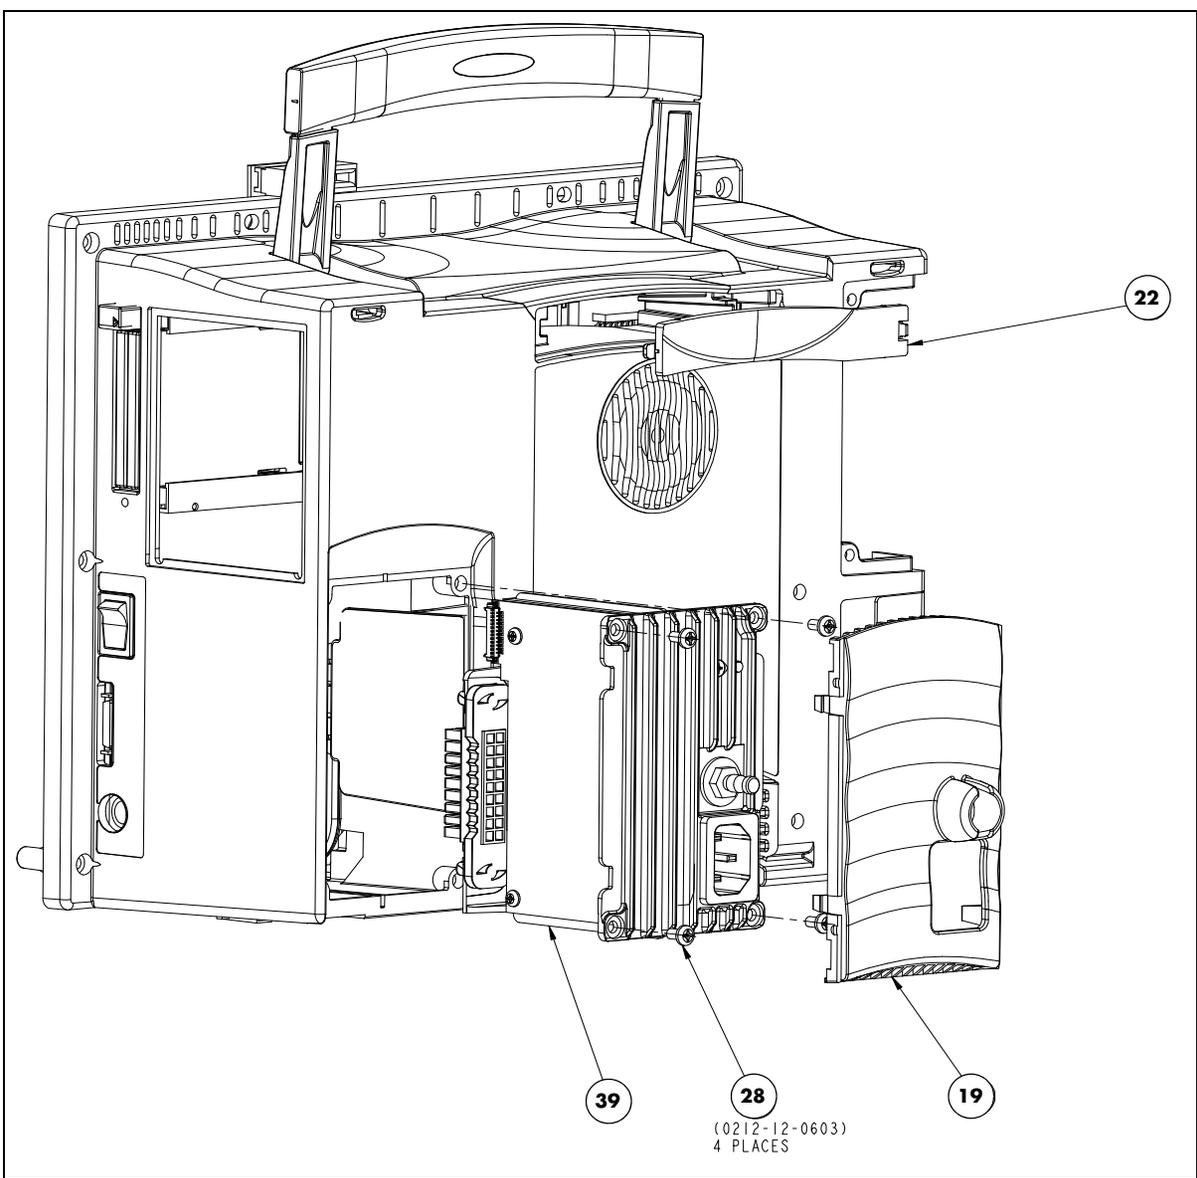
Rear Housing Assembly (Sealed Lead Acid battery configuration)
